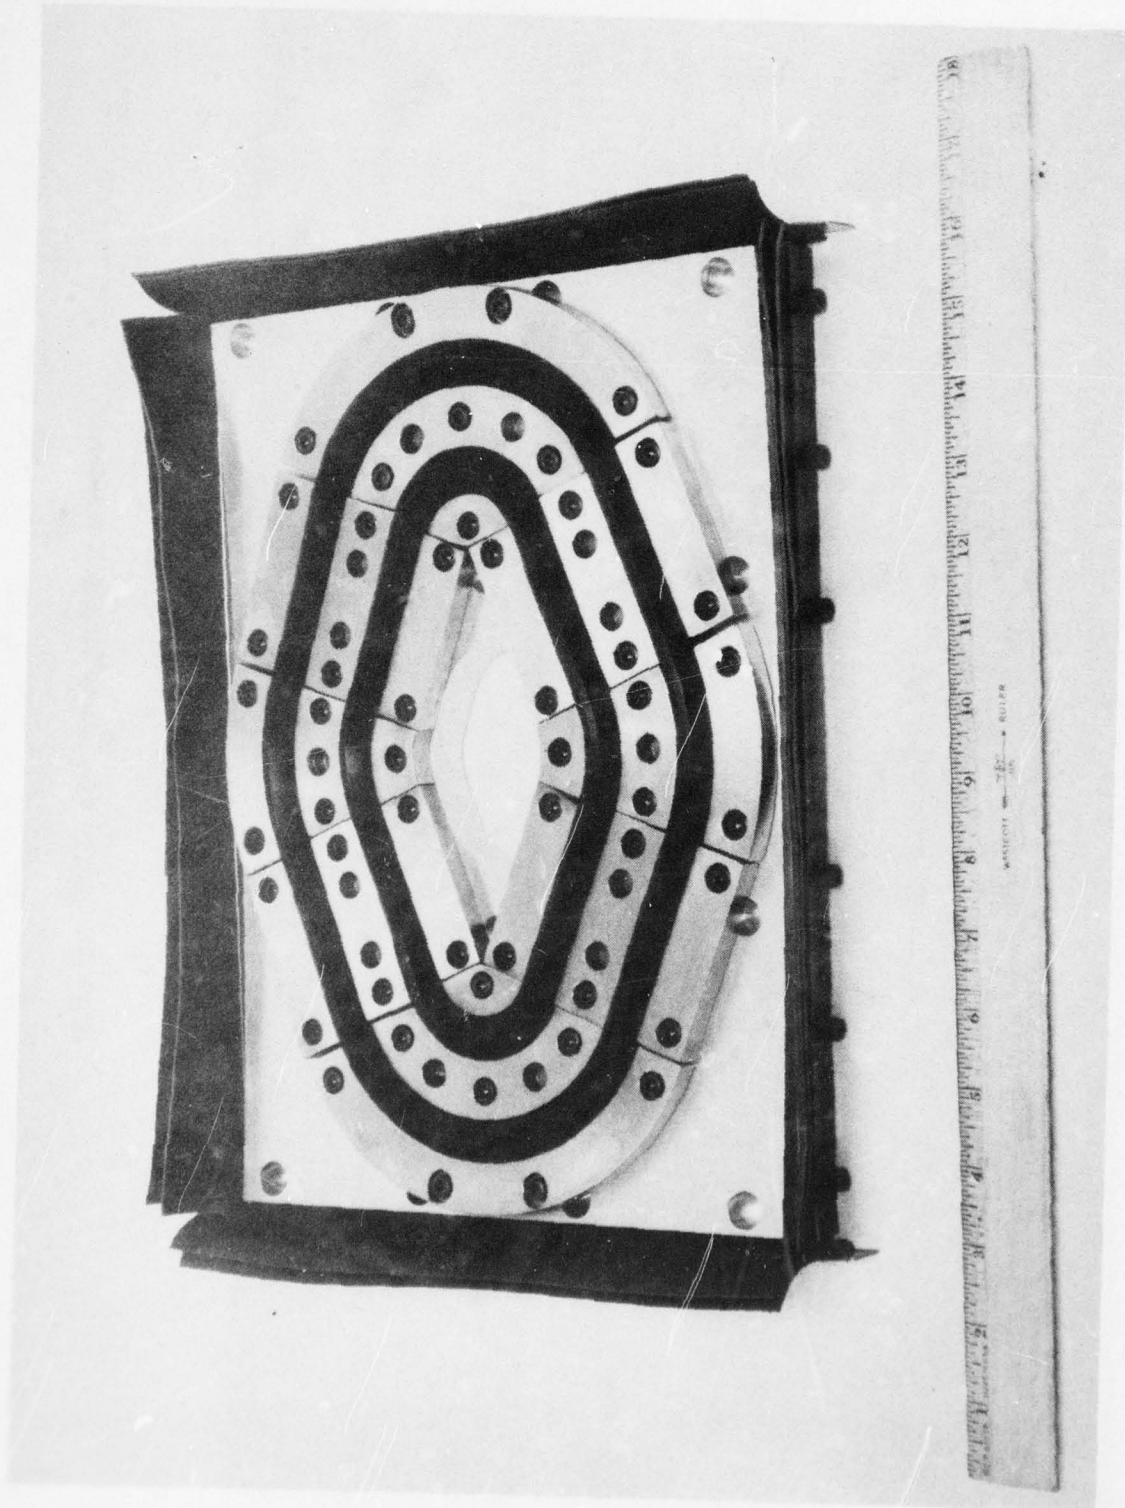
Sliding Seals and Radiation Shielding on Curved Head Plate
